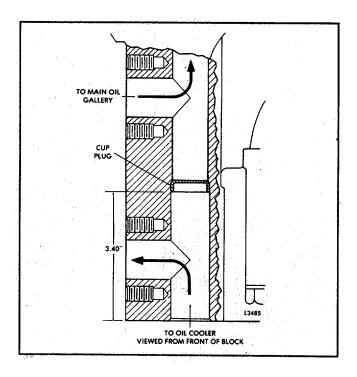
Oil Cooler Adaptor and Bypass Valve
